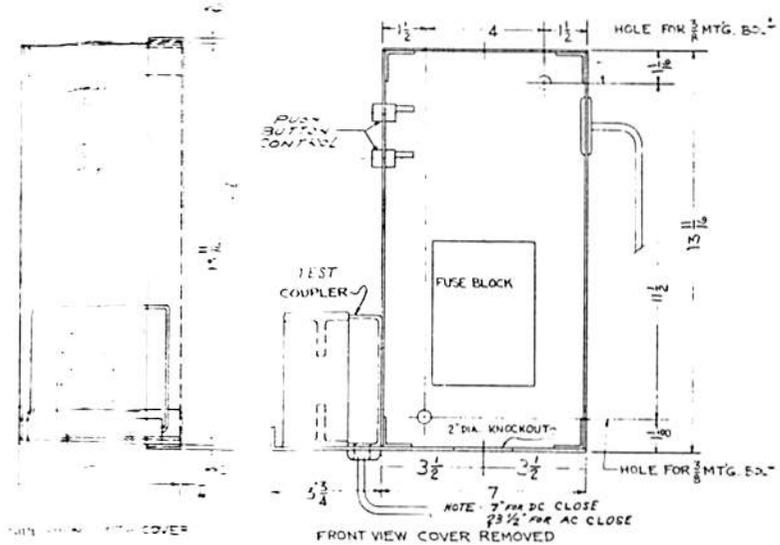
Testing Cabinet for 13.8 KV Metal-clad Switchgear
